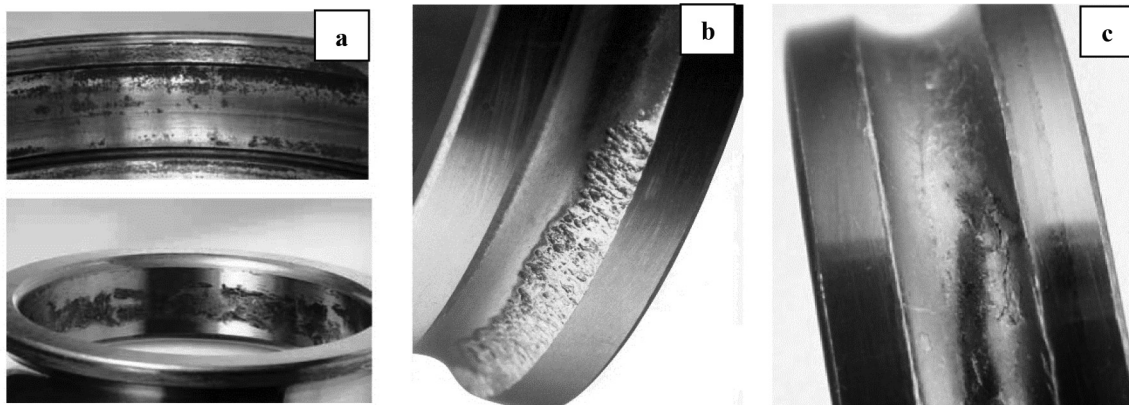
(a, b, c) Inner race defect of the ball bearing.
